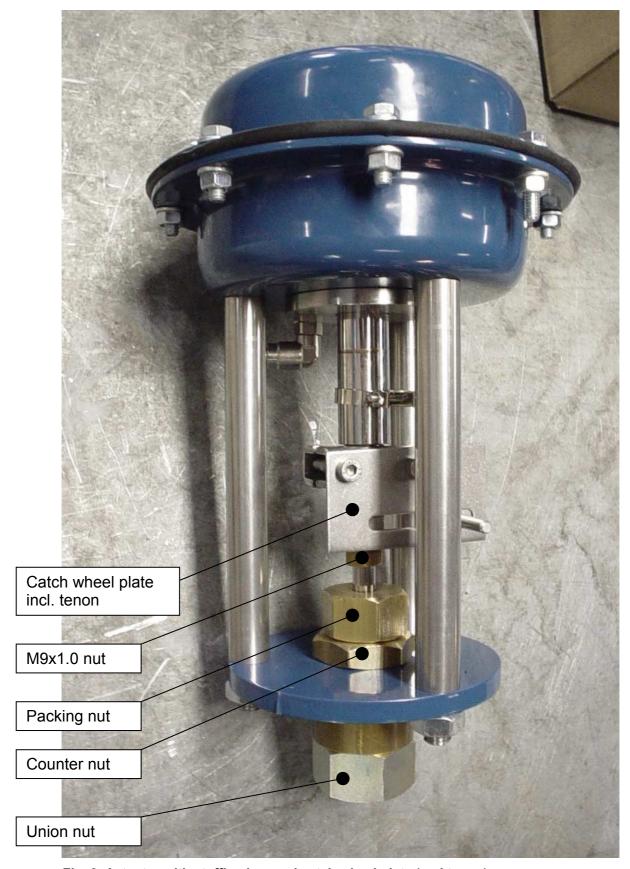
Actuator with stuffing box and catch wheel plate (and tenon)
